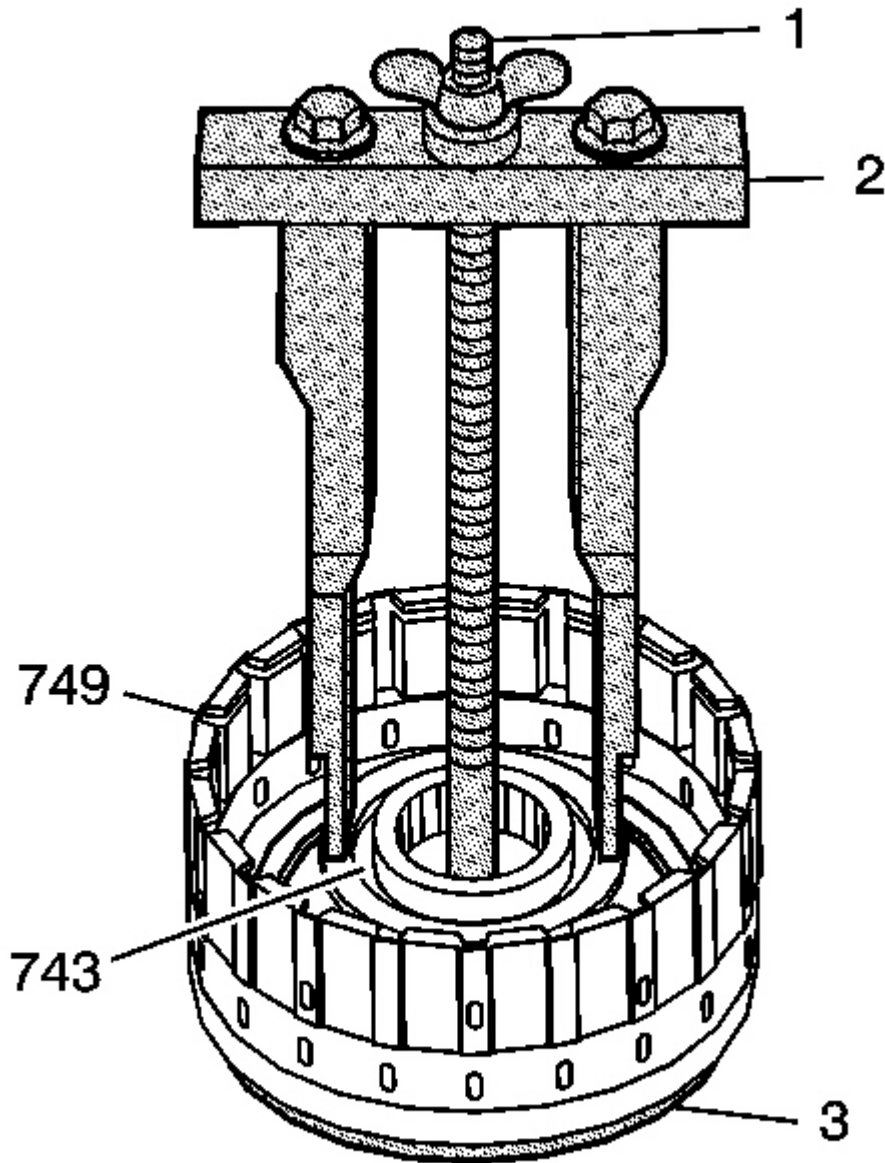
2nd Clutch Disassemble, J 45124, J 23327 J 21420-2 & Clutch Spring Retainer Cap Retaining Ring
